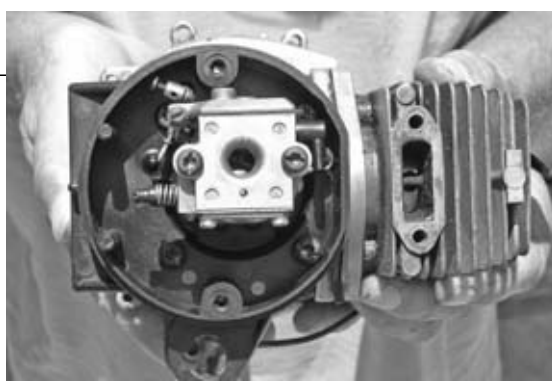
Reed-valve engines mount their carburetors low on the crankcase.* Robert Shelby
